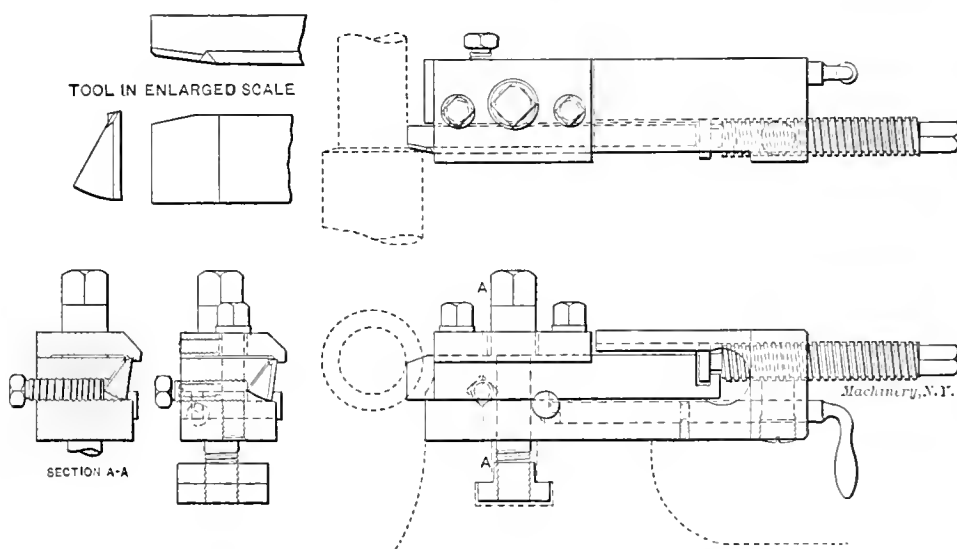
Holder for No-clearance Tool when used in the Engine Lathe.
